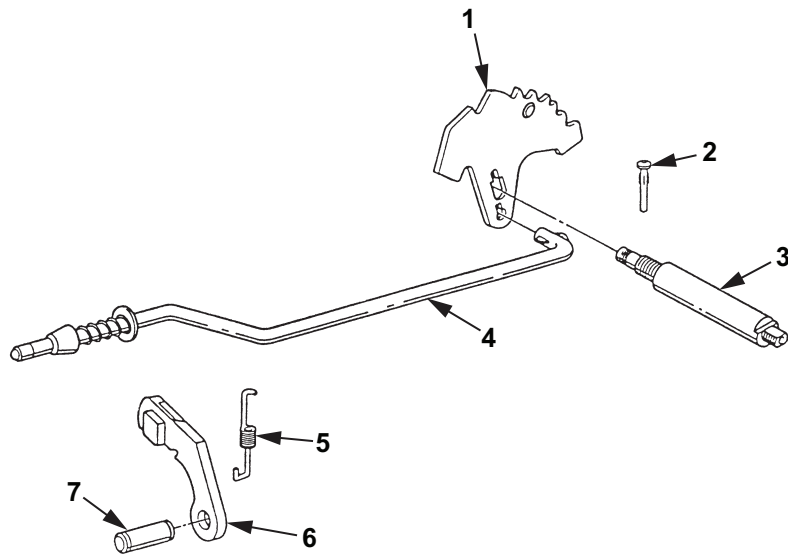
Parking Pawl and Actuator Assembly Inspection.
